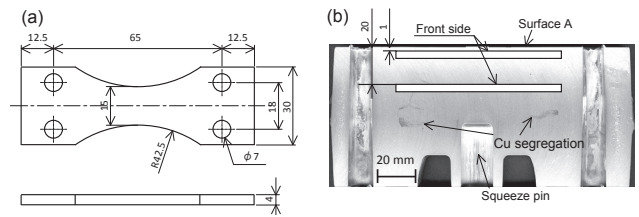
Dimension of bending fatigue test specimen (a) and position of specimens in die-casting (b). Micrograph (b) shows Cu segregation in P section with local squeezing.
